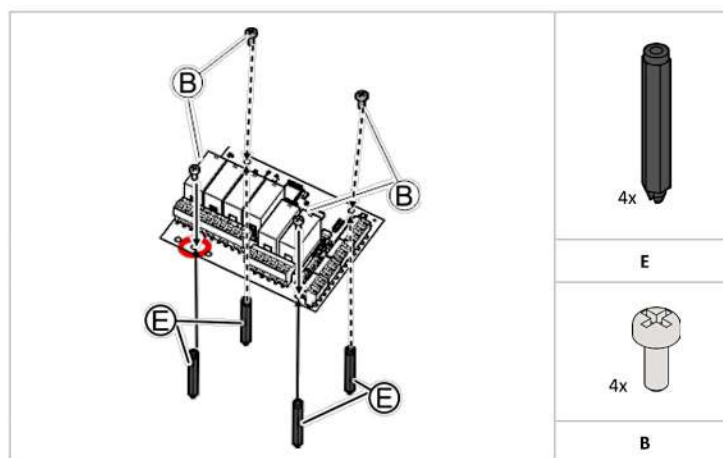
Assembly using the example of the TST RFUxIO-E
